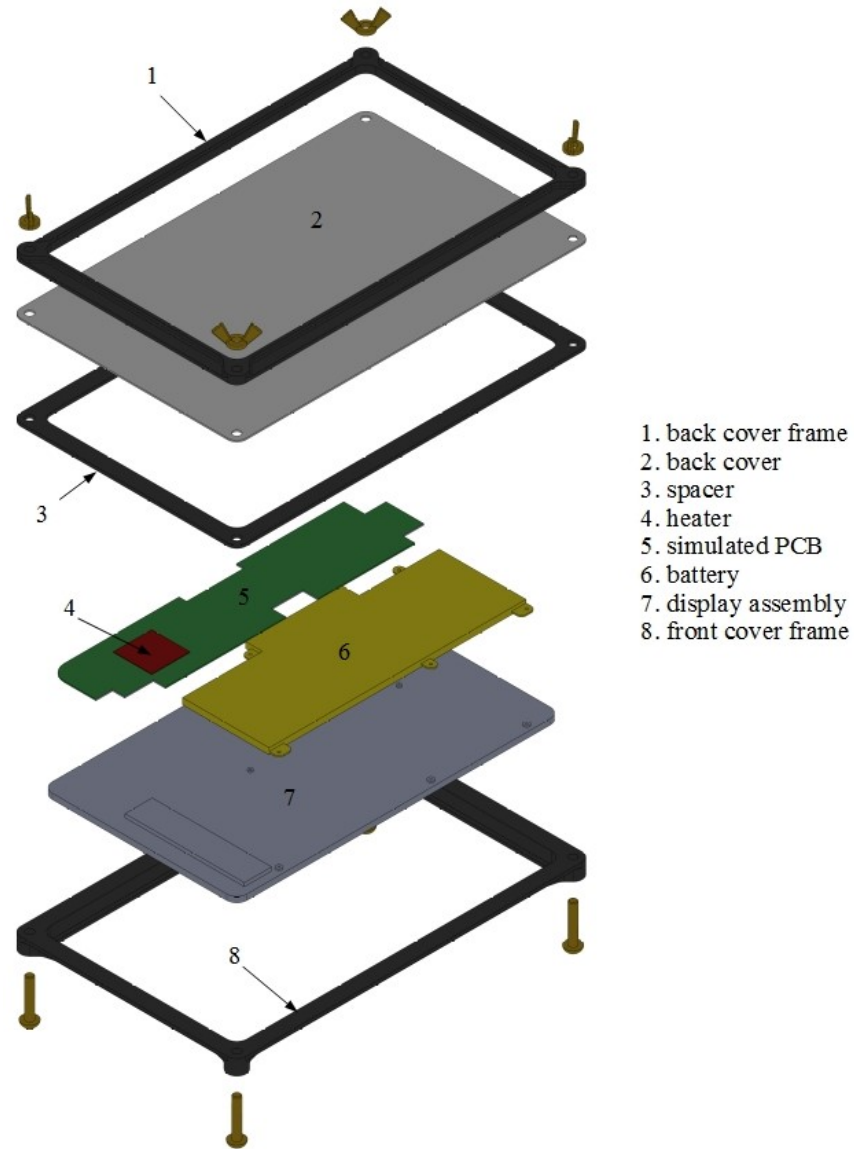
Rendering showing an exploded view of the mock tablet
